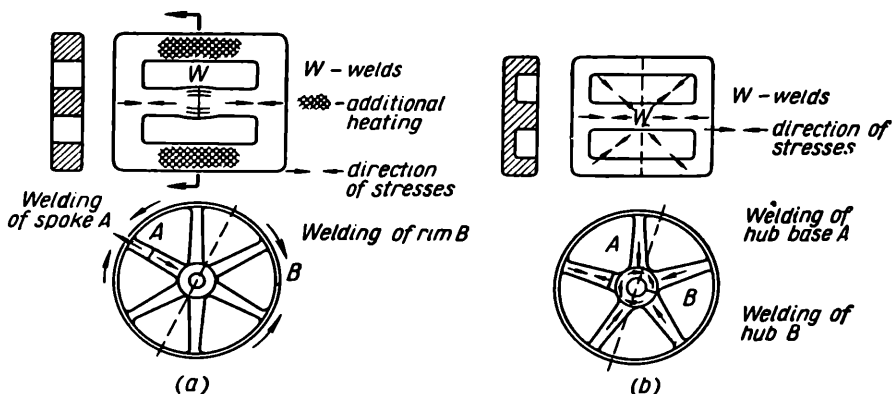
Cast-iron welding with (a) local and (b) general preheating
